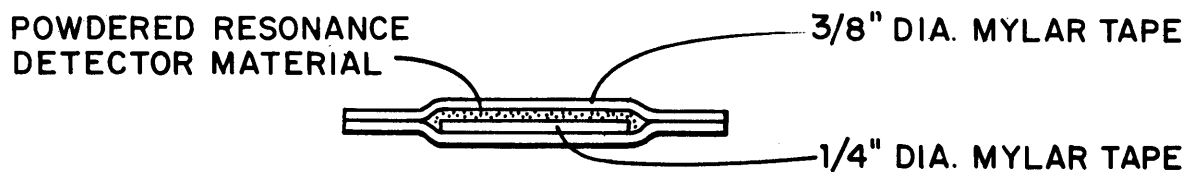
CROSS SECTIONAL VIEW OF THE POWDER FOILS
